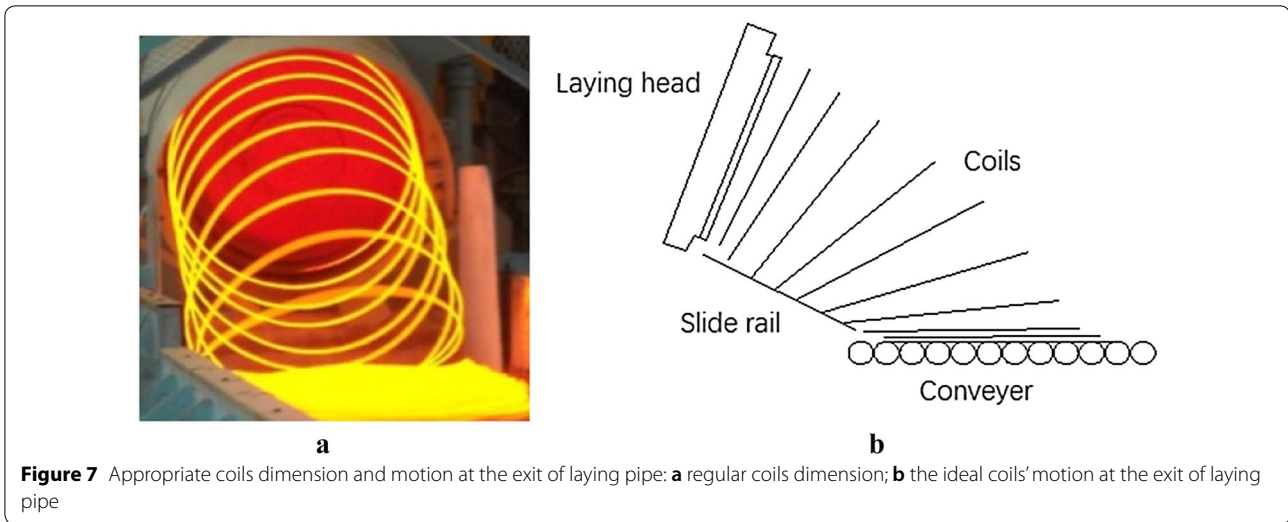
Appropriate coils dimension and motion at the exit of laying pipe: a regular coils dimension; b the ideal coils' motion at the exit of laying pipe
